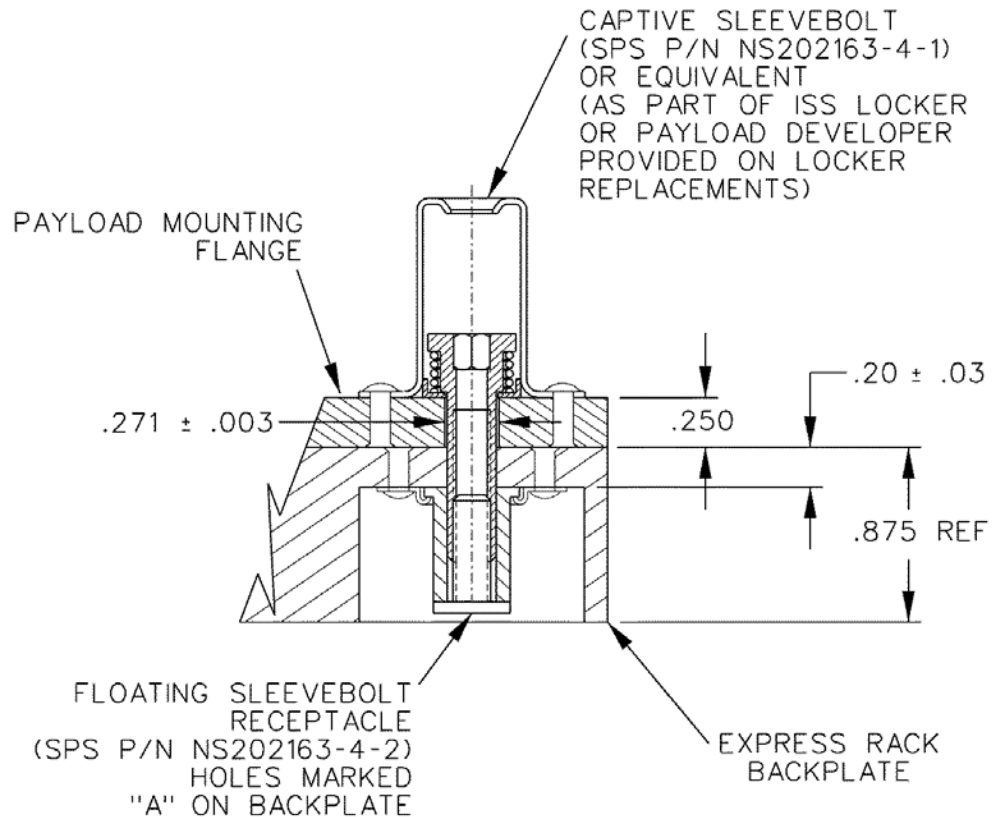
PAYLOAD ATTACHMENT POINT DETAILS (PART 2 OF 2)
